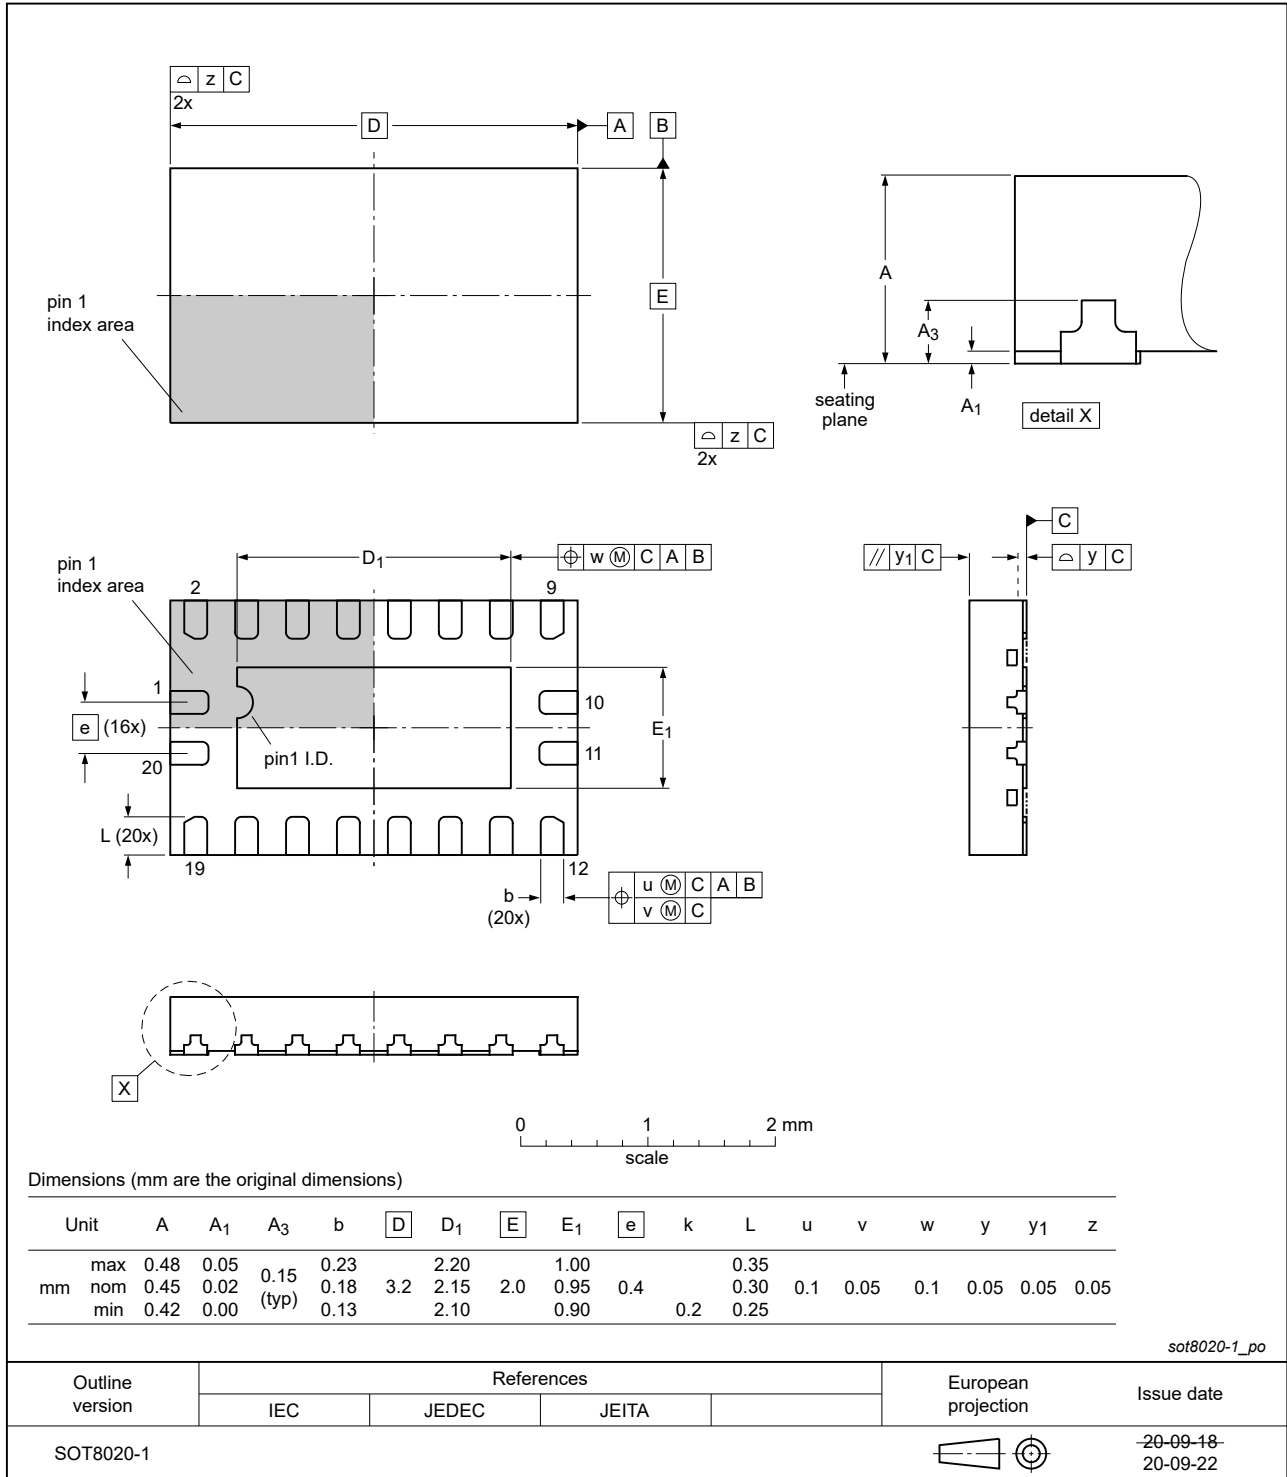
Package outline SOT8020-1 (DHXQFN20)
